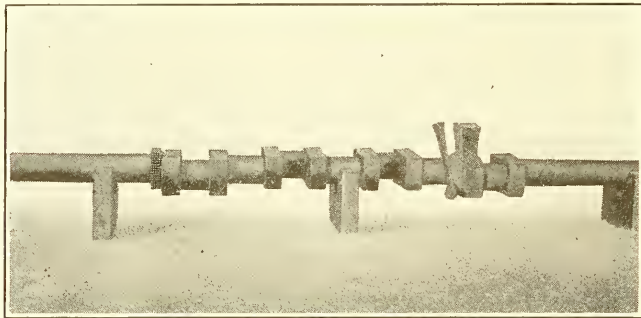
Welded in  $6\frac{1}{2}$  In. Crankshaft Broken in the Web.
